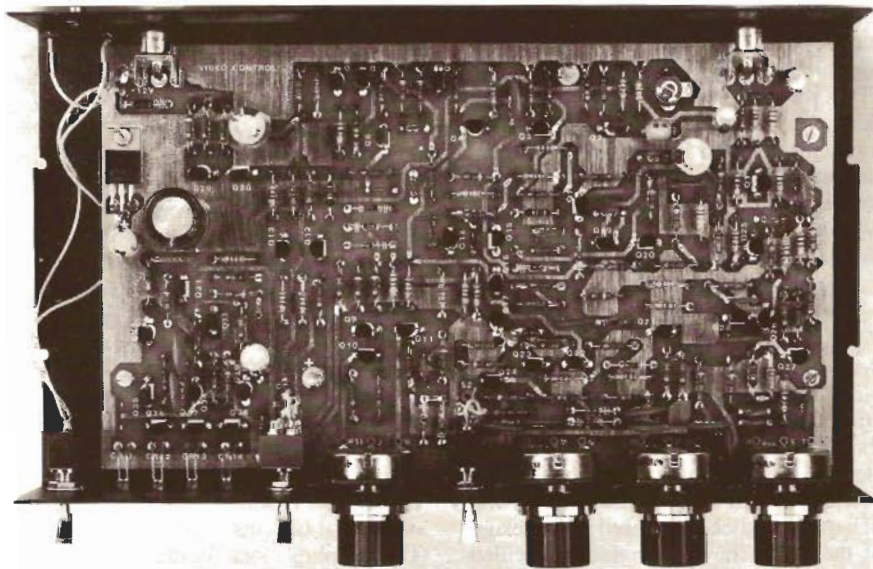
A METAL CASE IS NECESSARY to ensure shielding. The potentiometers and phono jacks are mounted directly to the board without interconnecting wires.
